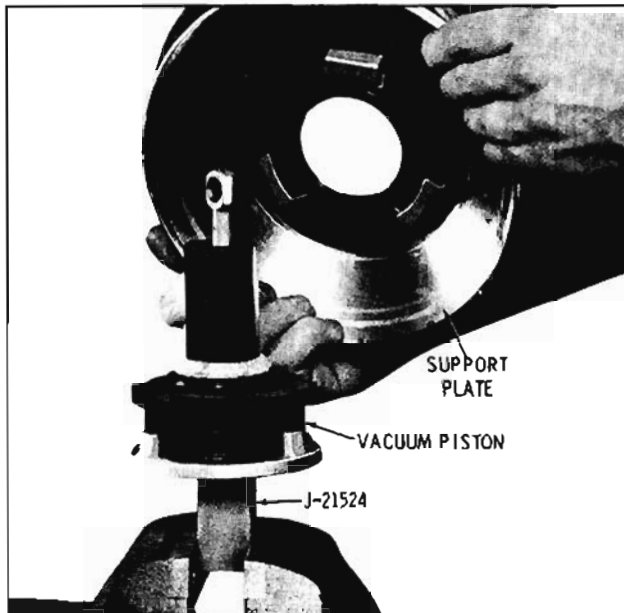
Positioning Support Plate on Vacuum Piston
